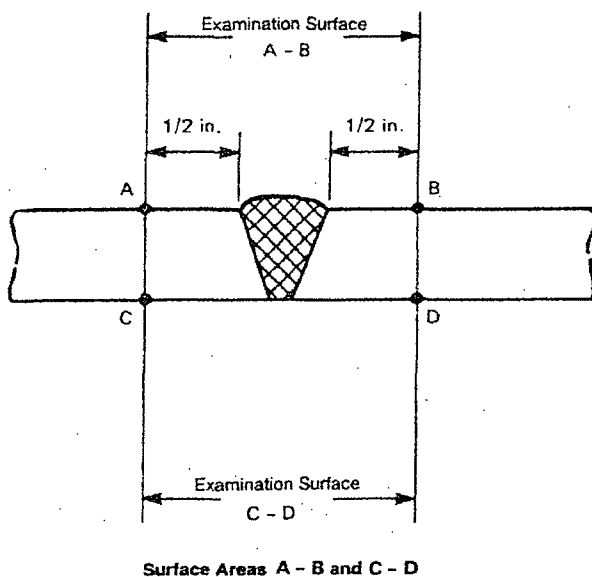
DISSIMILAR METAL WELDS
